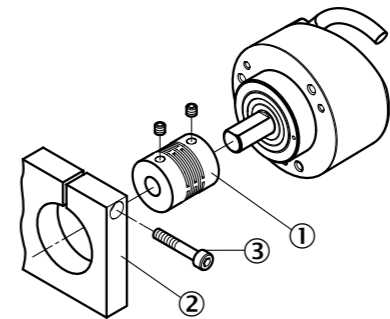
Mounting of DBS60 Core servo flange with servo-clamps
